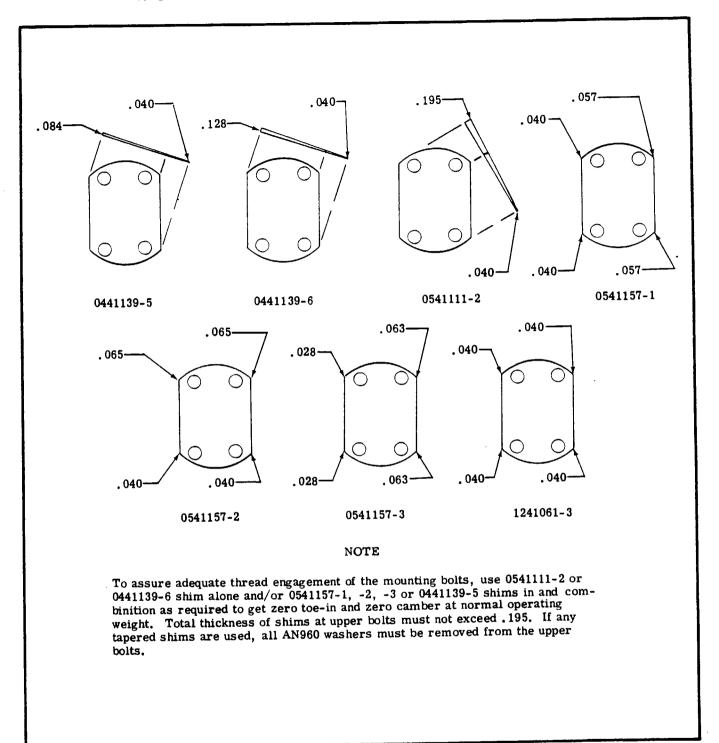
Wheel Alignment (Sheet 2 of 2)
